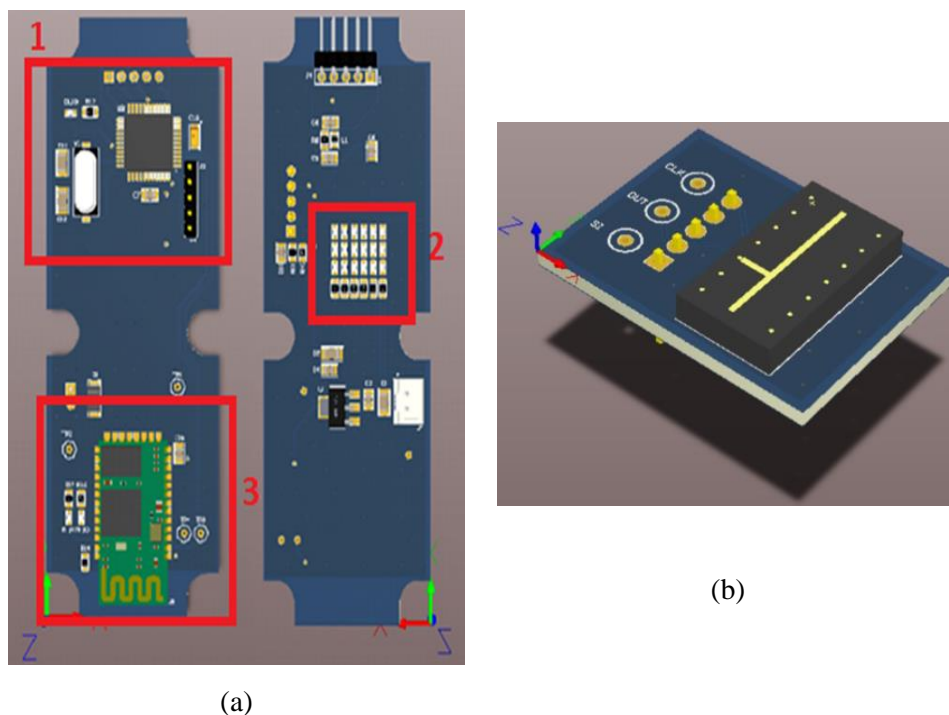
(a) Main PCB (front and rear) with a microcontroller (1); LED matrix (2); Bluetooth module (3). (b) PCB with the photodetector array; the two boards are connected through the JTS pins observable in the upper part in the rear of the main PCB.
